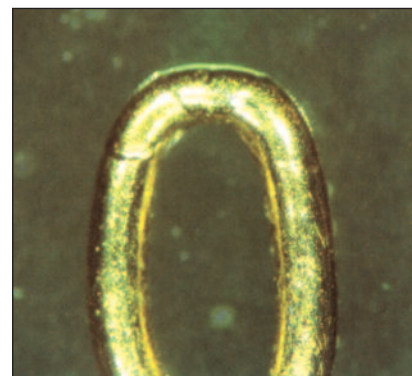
18 carat gold chain link welded by laser beam
